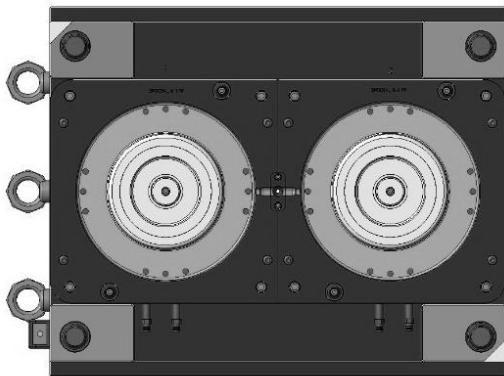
The two cavity inserts assembled in the mold fixed plate
